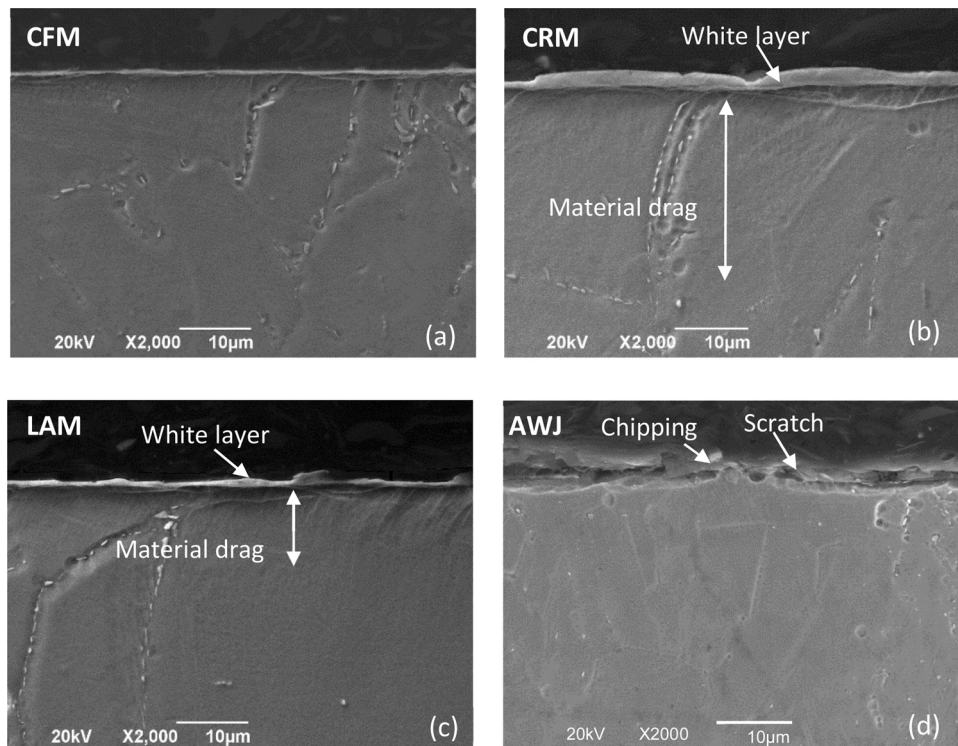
Superficial surface microstructure SEM images of workpiece machined with different processing methods.
